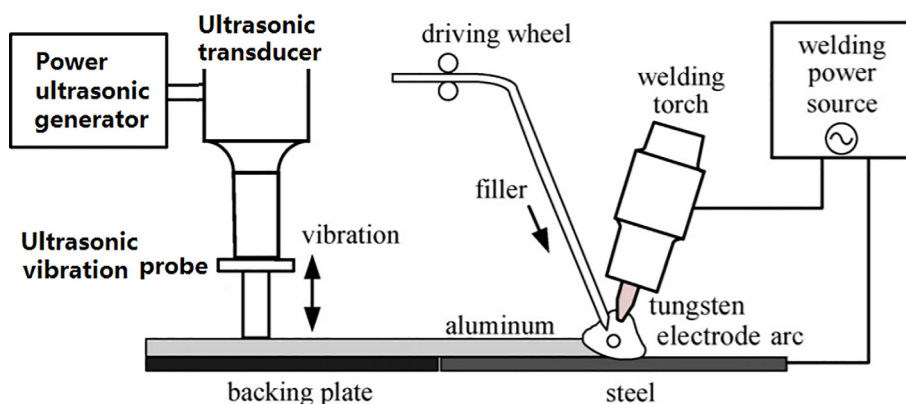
Ultrasonic-vibration-assisted gas tungsten arc welding process [156].
